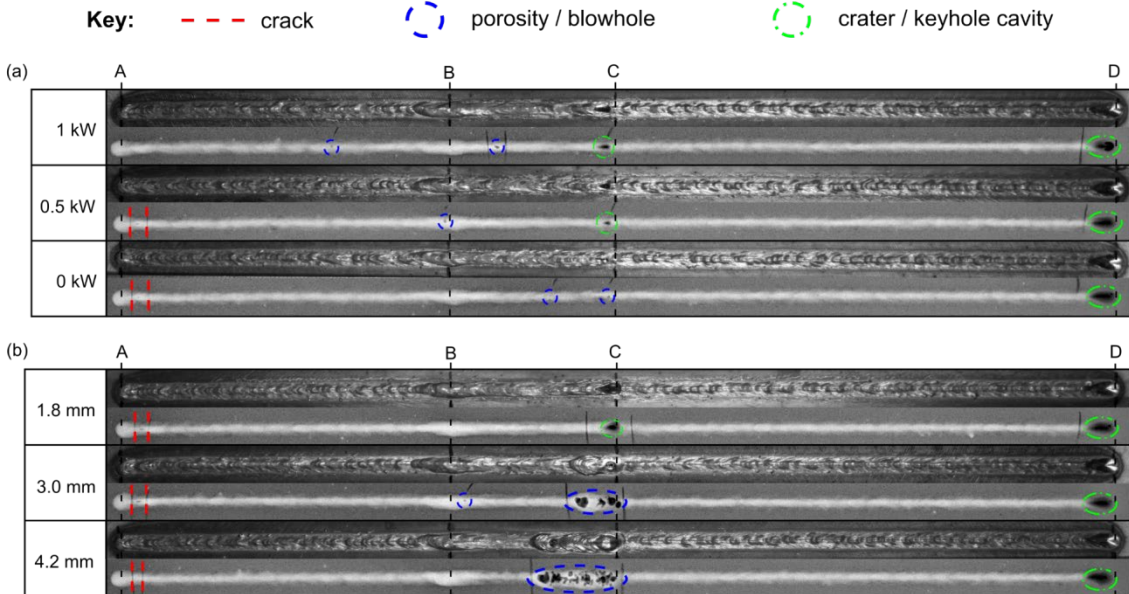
Bead surface and X-ray radiograph of; (a) laser power ramp down welds, (b) laser defocusing welds
